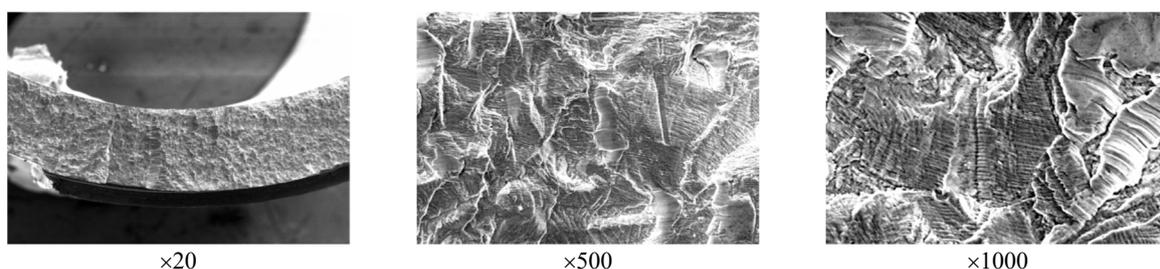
Macro morphology of the surface and section of the broken lubricating oil pipe
